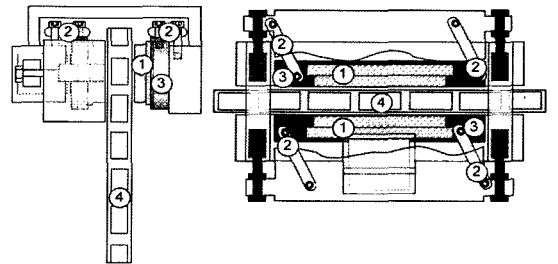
The EMB caliper with hydraulic chamber and linkage¹⁰⁾
